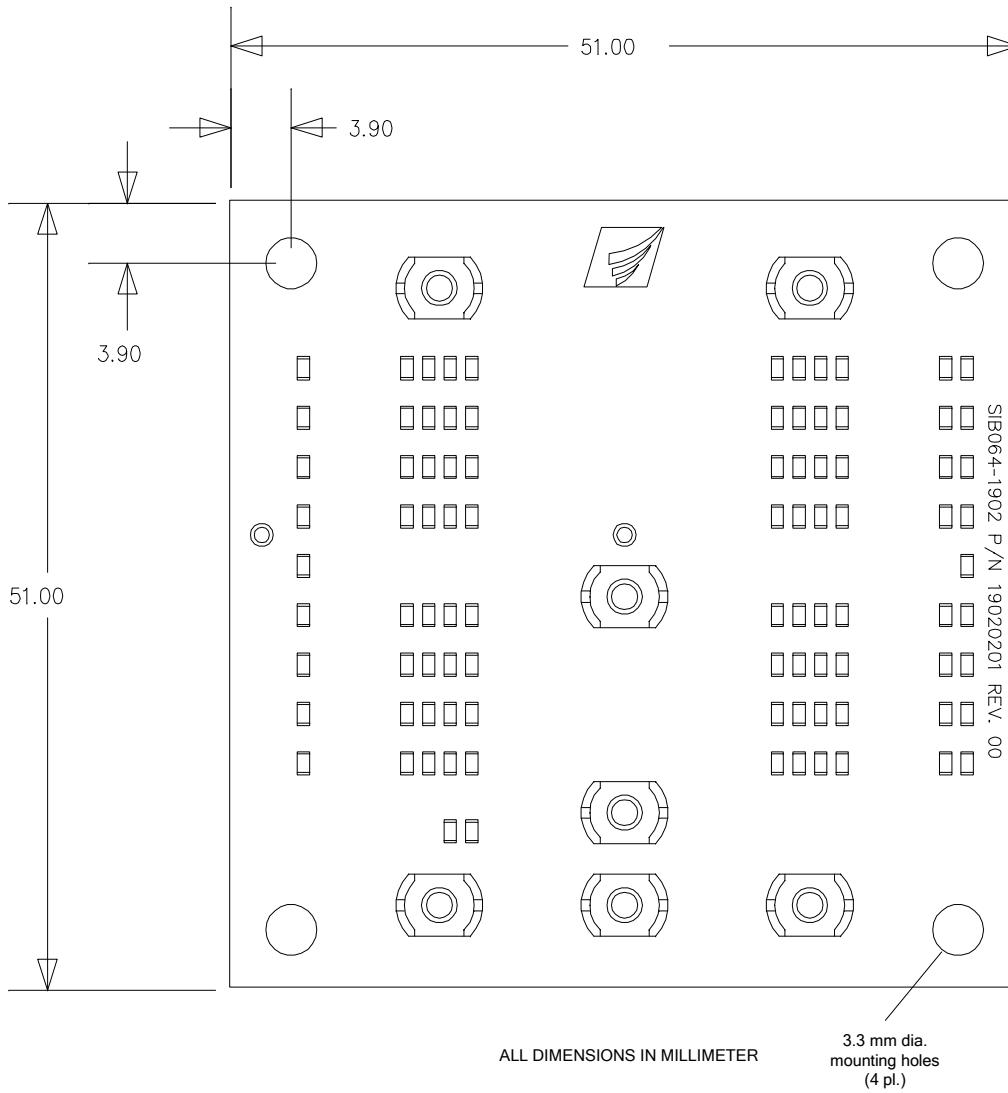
SIB064-1902 Printed Circuit Board Dimensions
